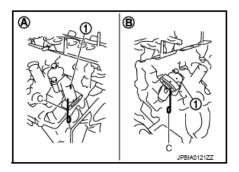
Identifying Timing Chain Tensioners With Stopper Pin Courtesy of NISSAN MOTOR CO., U.S.A.
